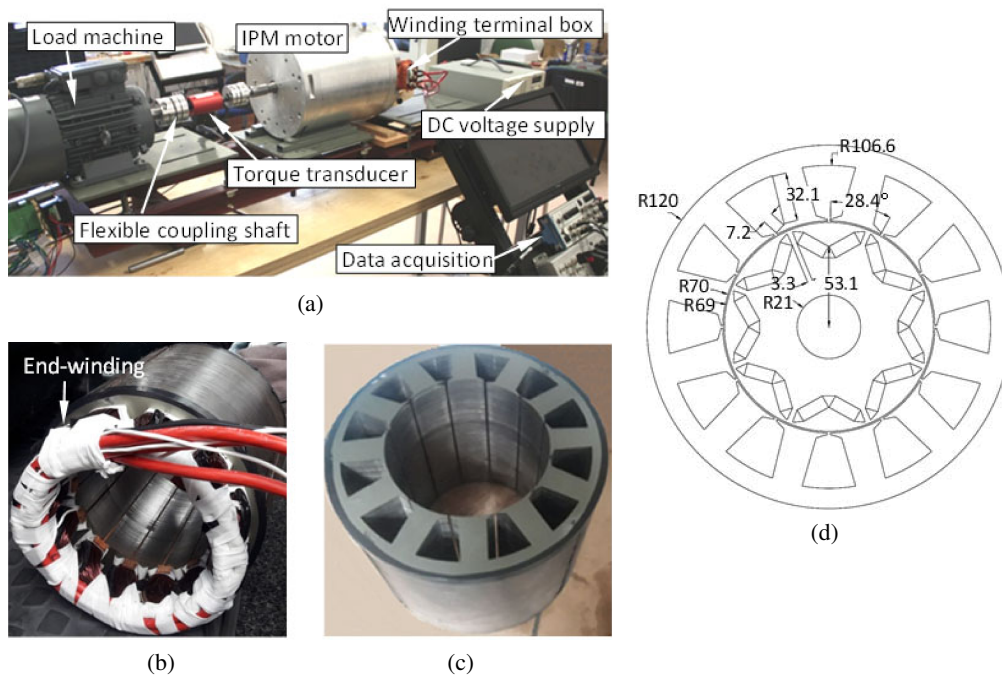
IPM motor prototype (80 kW) prior to its being mounting on the test rig (a); stator with concentrated winding (b); laminated stator core (c); main IPM motor dimensions (the dimensions of flux barrier are not presented here) (d)
